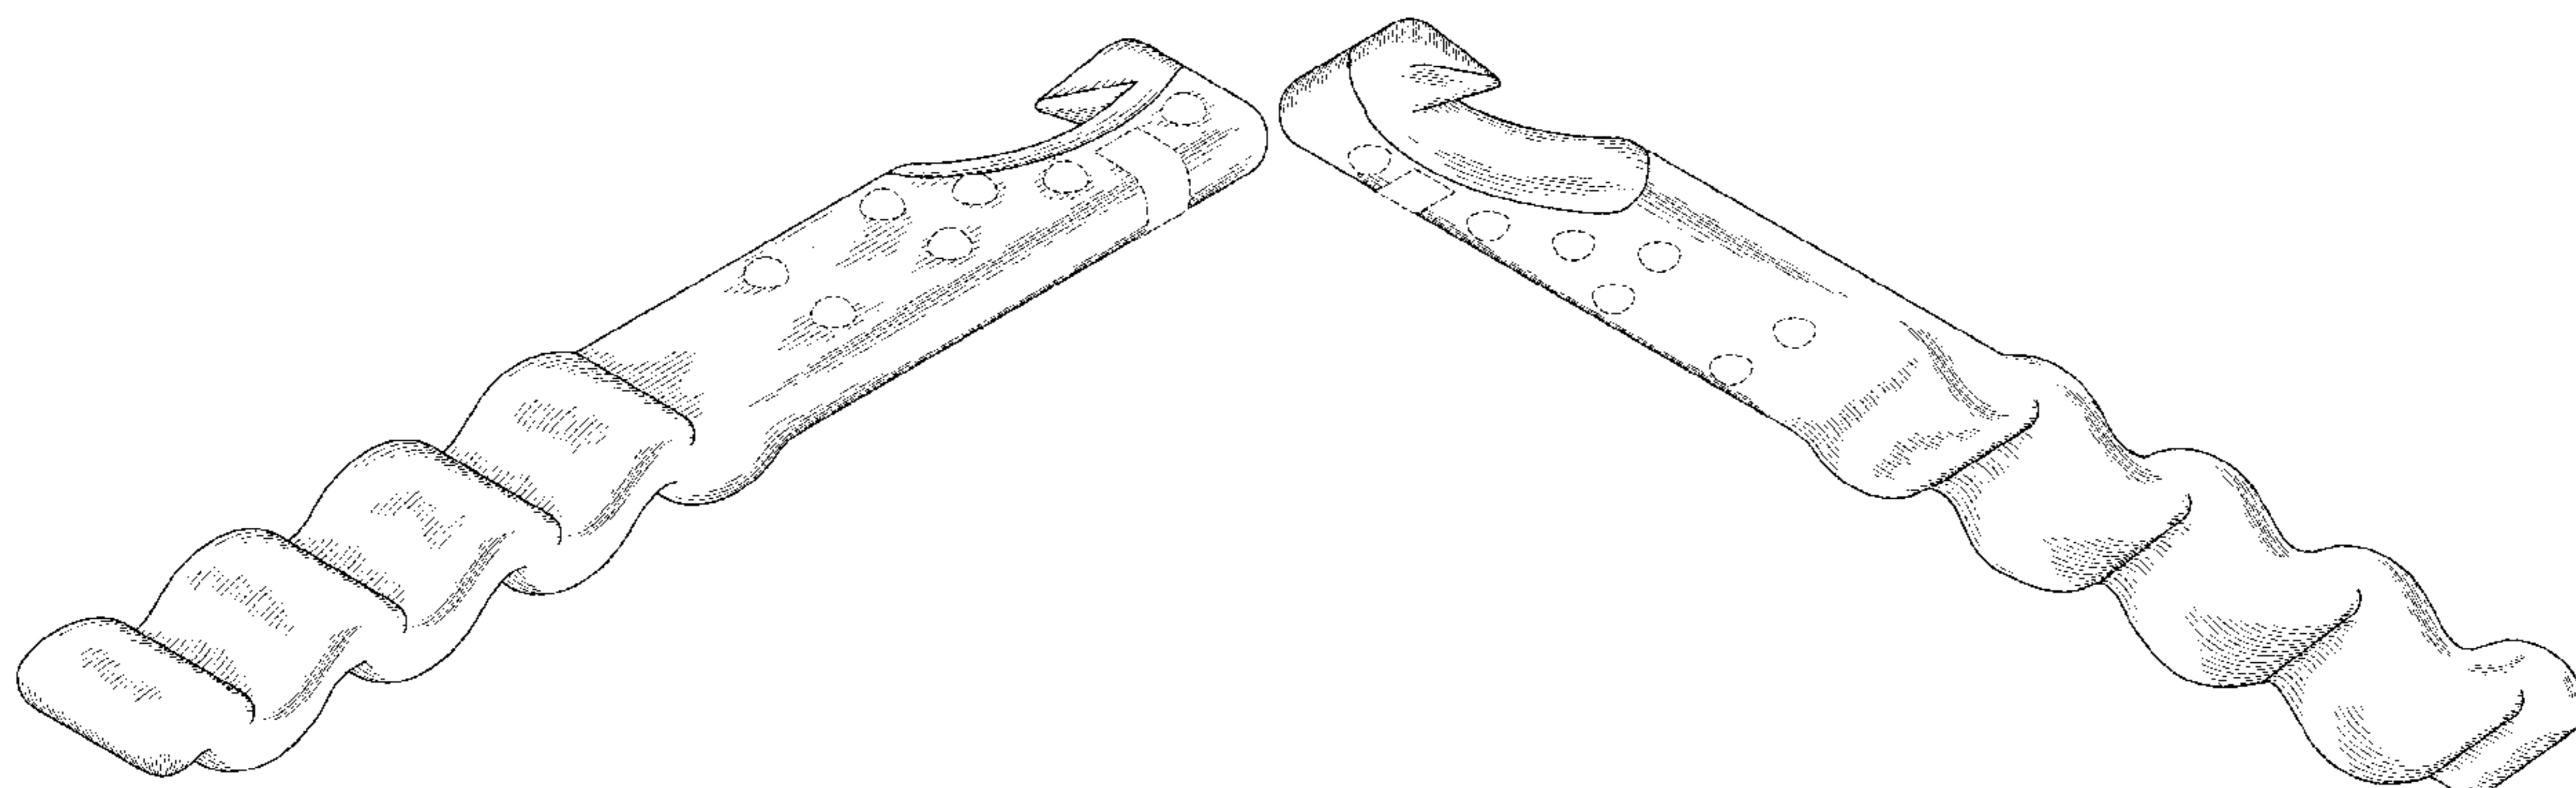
is a perspective view taken from the rear, the top and the left of the tool for seating and removing an orthodontic aligner.
